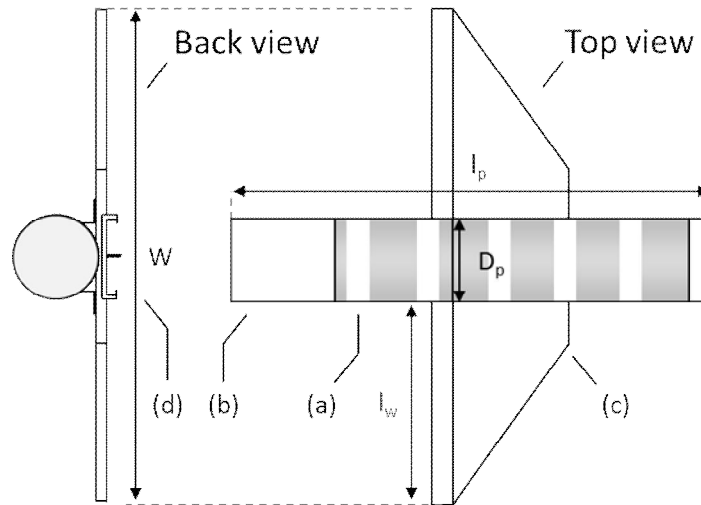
Main components of the 3D projectile construction: the (a) aluminium pipe, (b) steel pipe section, (c) aluminium wings, and (d) steel claws.
